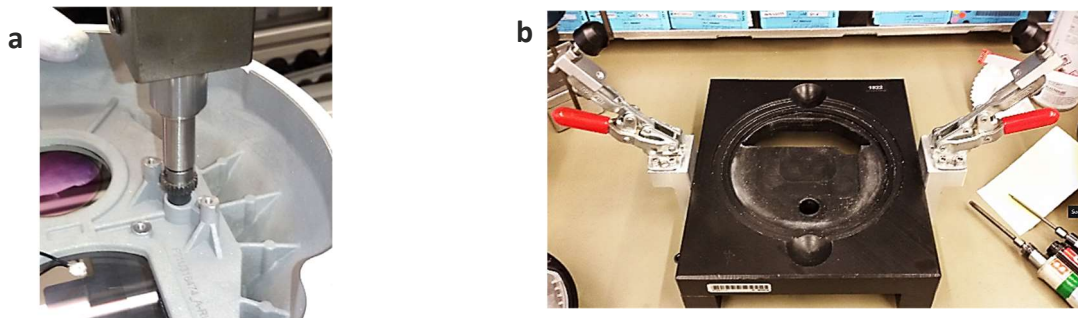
a) Manual press fit of one bushing; b) Fixture to assembly front shell.
